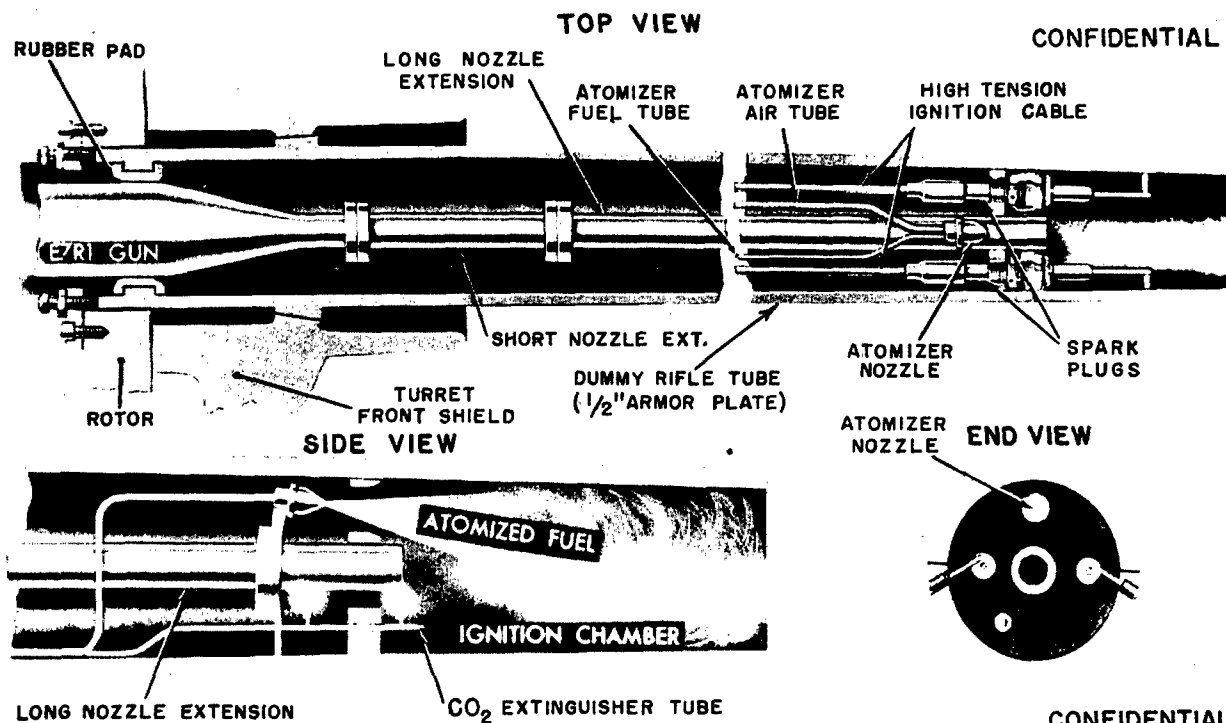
IGNITION SYSTEM IN DUMMY 75 M.M. TUBE
